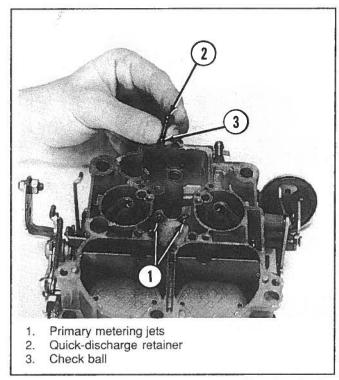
Removing Primary Jets, Retainer And Check Ball
